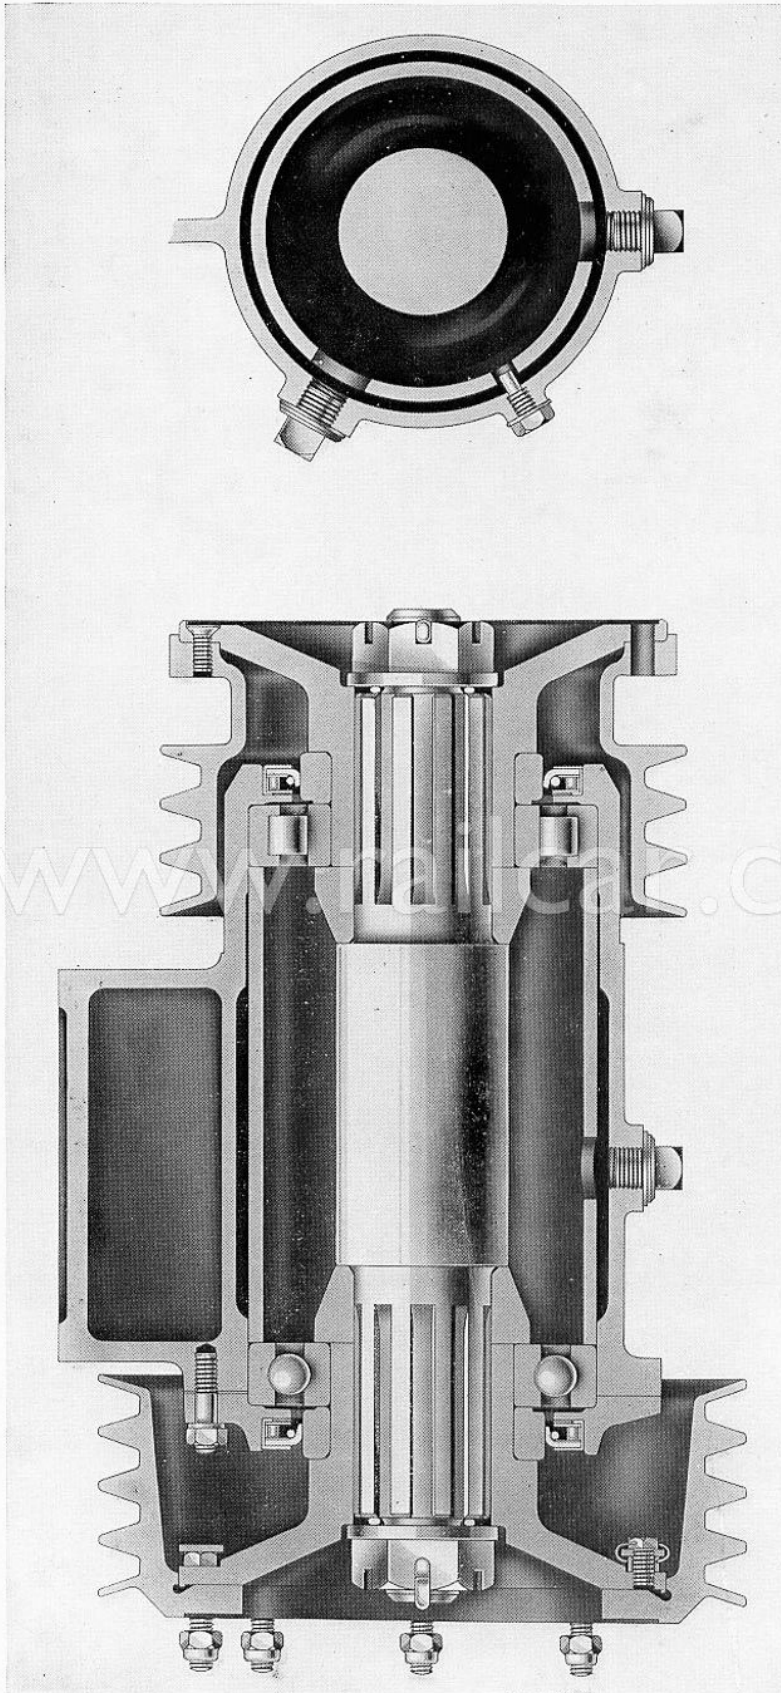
SECTION THROUGH AUXILIARY DRIVE
